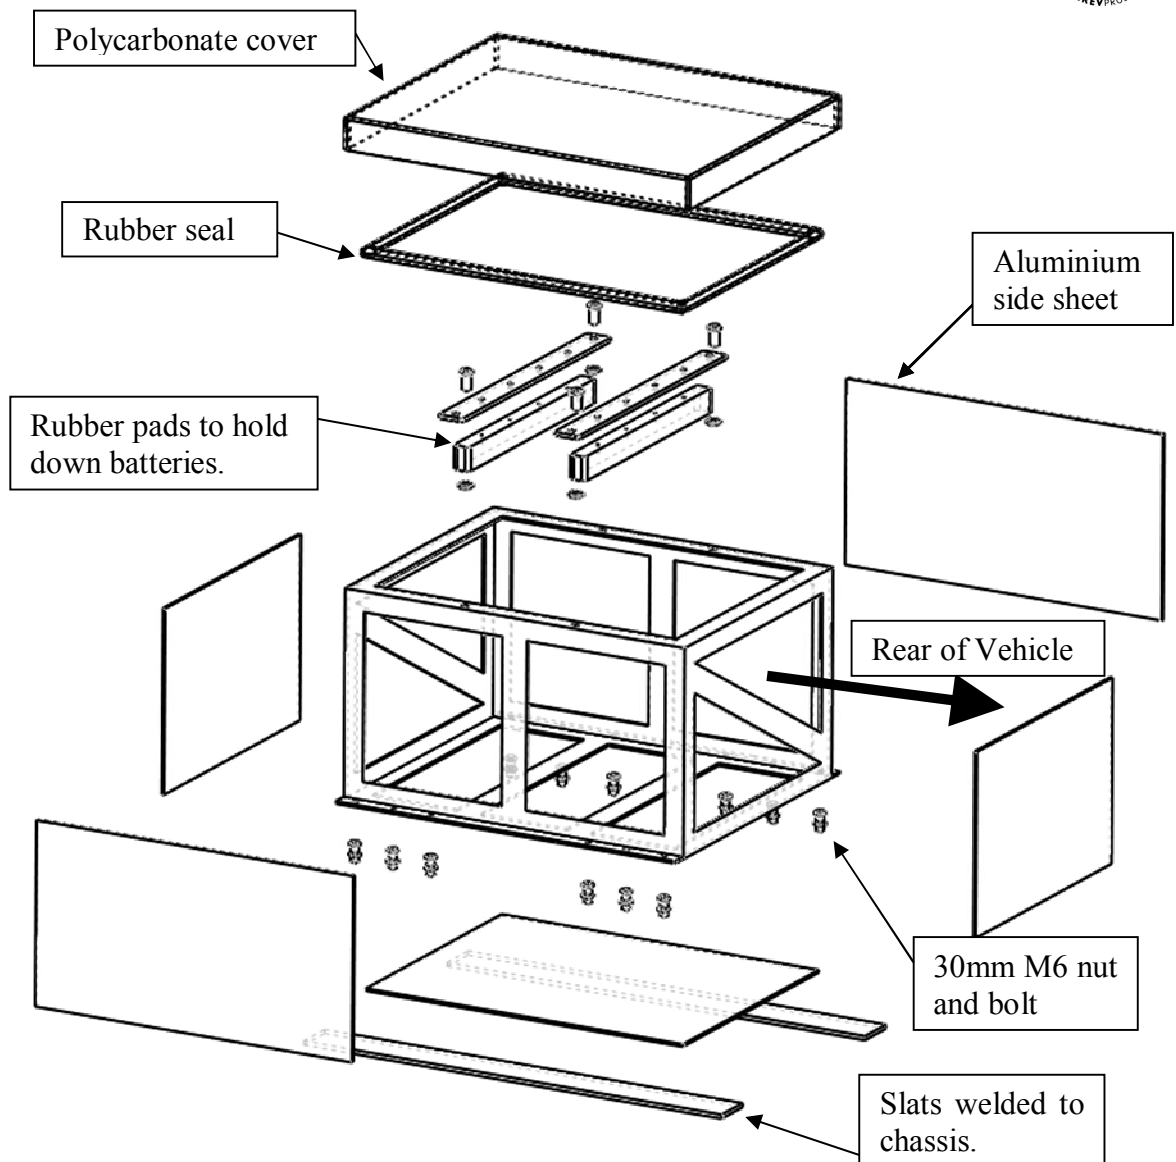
Exploded view of all components in the battery cage assembly. Aluminium sheets are shown outside the cage for simplicity but are sealed on the inside.
